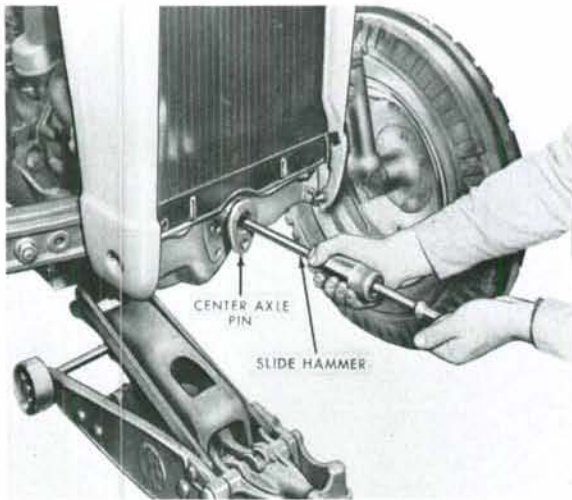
Removing original type non-threaded front axle pivot pin using a slide hammer arrangement.
